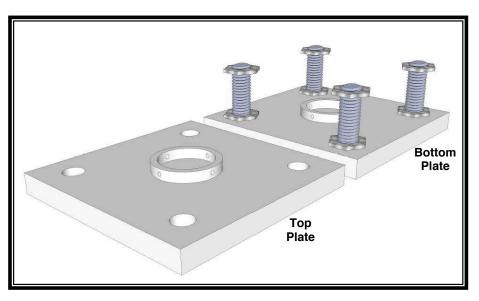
Improved pair of plates (i.e. Top and bottom plates)
